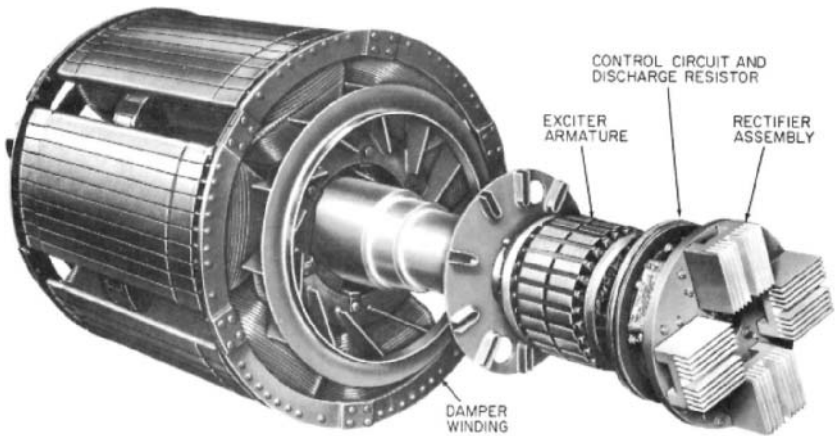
Brushless synchronous motor with ac generator mounted on the shaft with rectifier and control devices (Electric Machinery Manufacturing)
